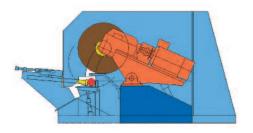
Type W - chop-stroke cut-off machine with horizontal rocker
